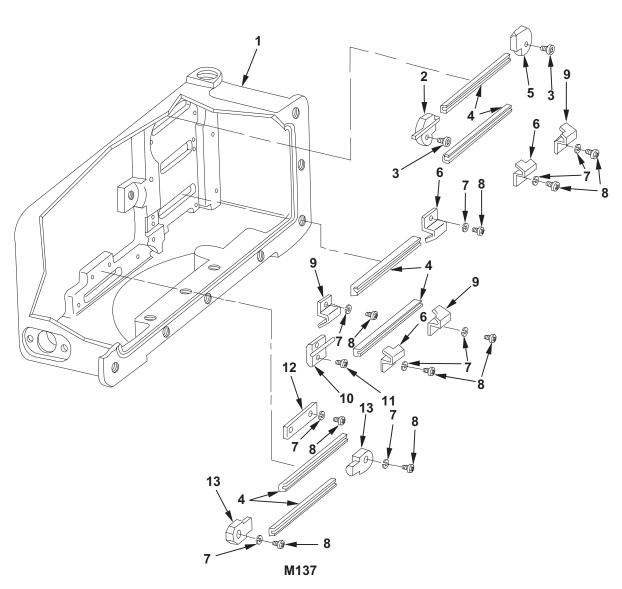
Counter Box Assembly, M137, 11741102-1, and Counter Box Assembly, M137A2/M137A3, 12984734, Internal Parts (Sheet 1 of 2).
